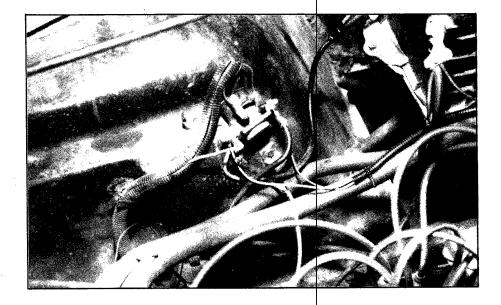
Wiring harness passing through firewall, showing 1½" hole, grommet, and mounting of fuel pump relay and power fuses.
